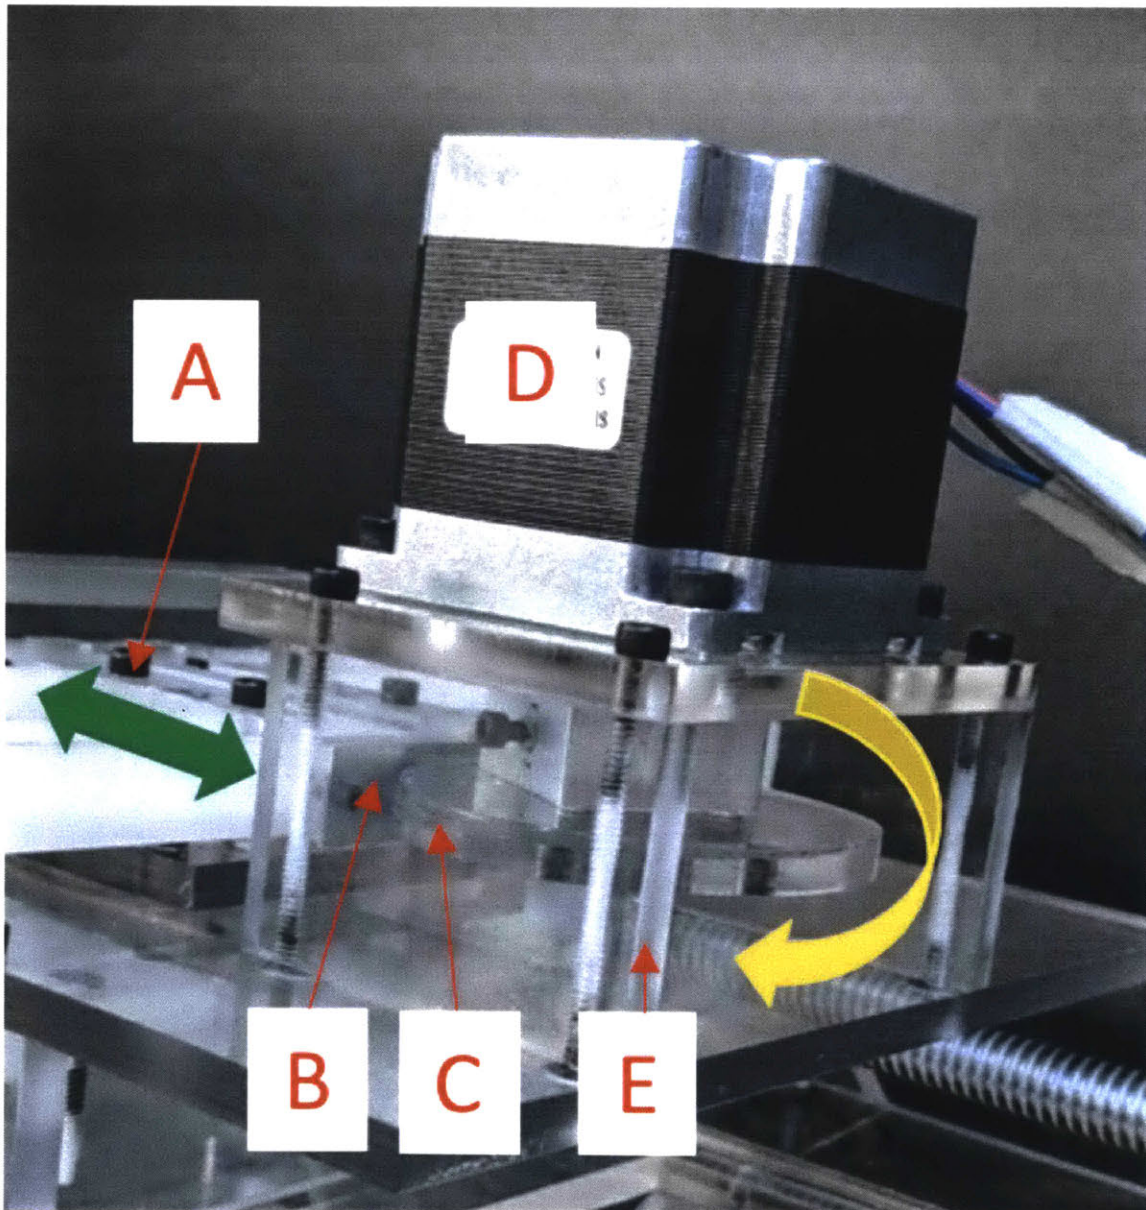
Isometric view of cam mechanism. A) Flexure. B) Metal contact surface on flexure. C) Cam. D) Stepper motor. E) Cam mechanism mounting structure. Note: The yellow
